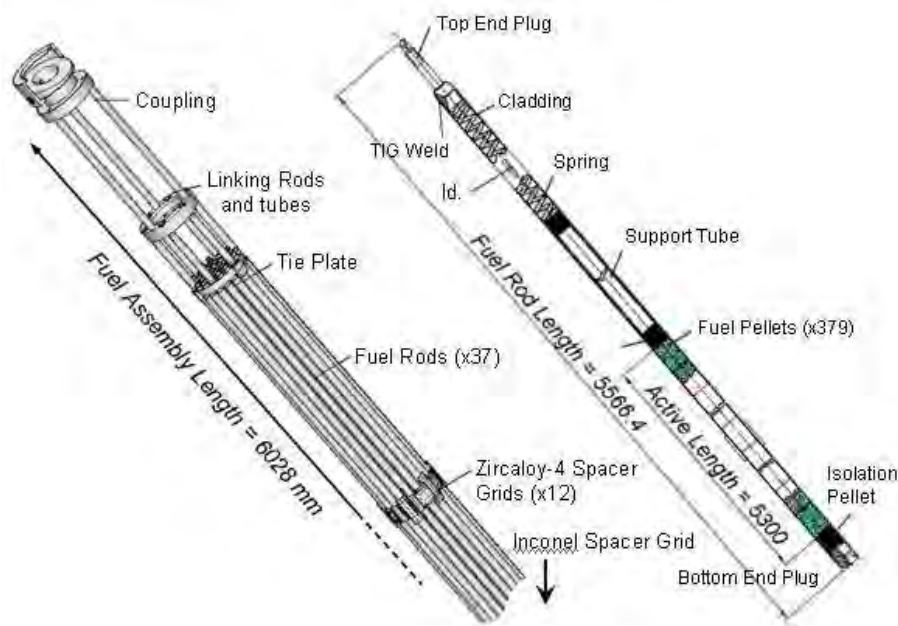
CNA-2 fuel assembly design and fuel rod details [11].
